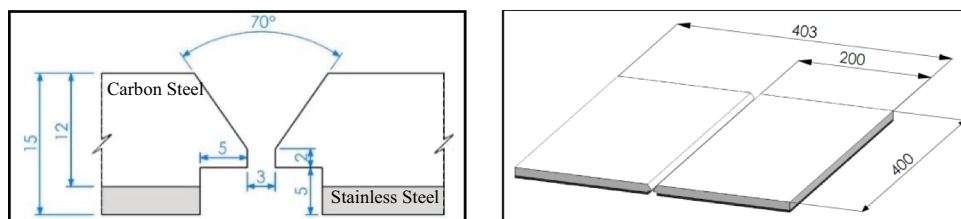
(a) Fitting up operation form and dimensional details of the U-V shape<sup>5</sup> and (b) dimensional details of the test coupon plates.
